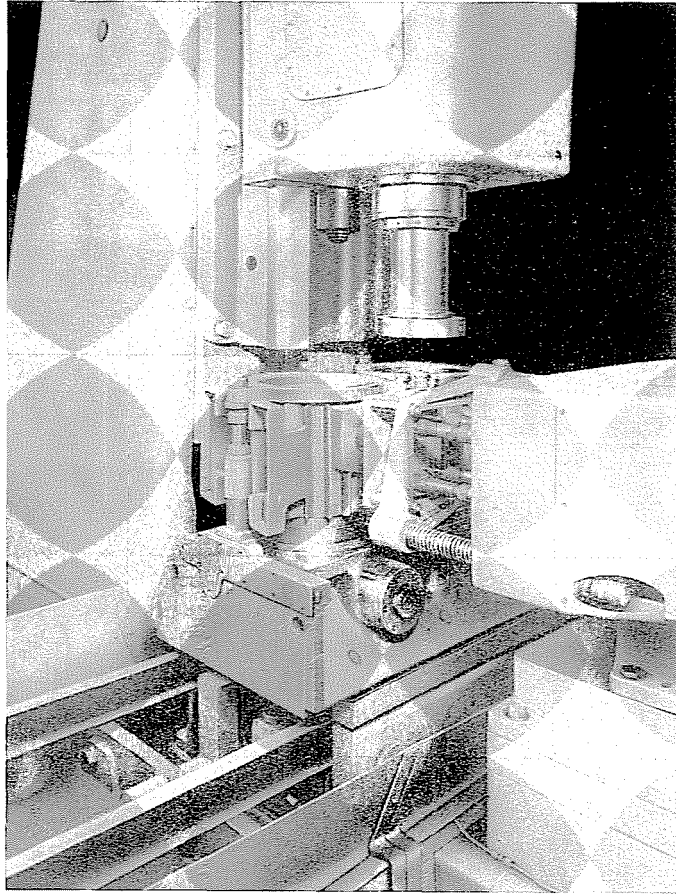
Shows the units for finishing the main bore and drilling for the screws fastening the cable box
